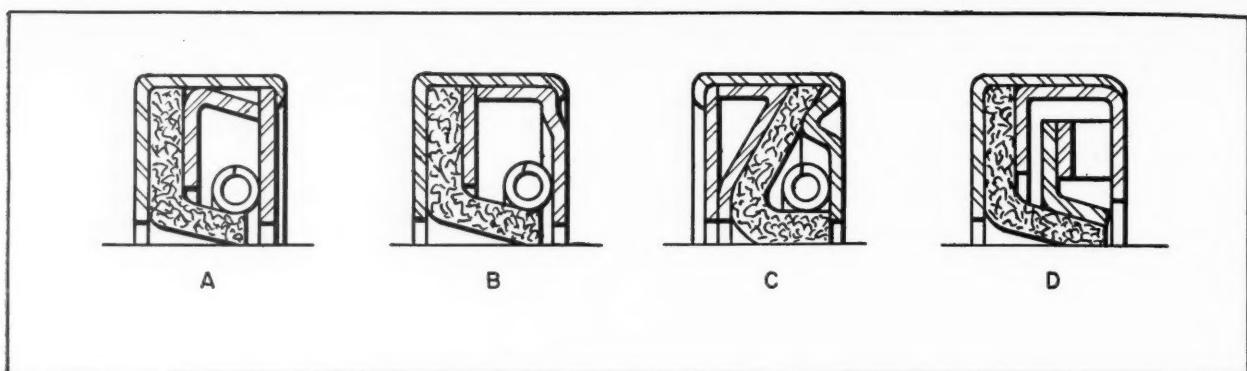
Single unit type spring-loaded leather seals. A leather seal, held against the shaft by a garter spring, is used in the designs seen at (A), (B), and (C), while a spring-cushioned metal washer or serrated type finger spring is used in the design illustrated at (D)
